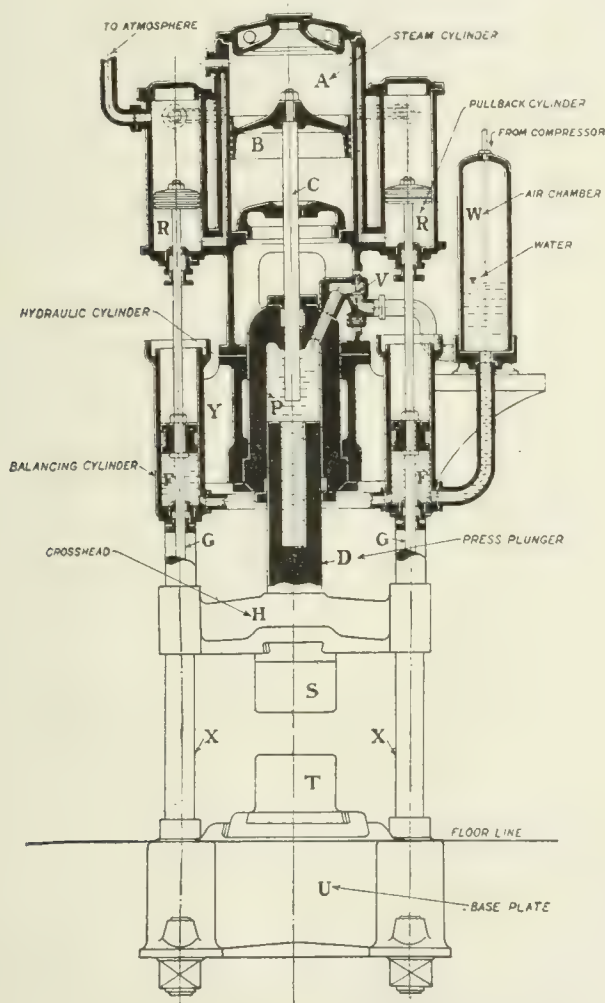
Scheme of Operation of Steam-Hydraulic Forging Press.
